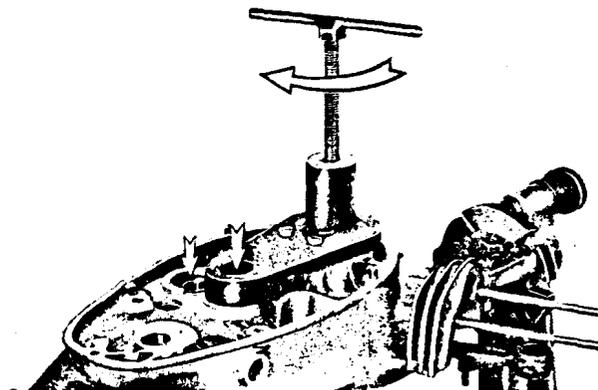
Pushing out the crankshaft by means of the 22-50.013 pusher
